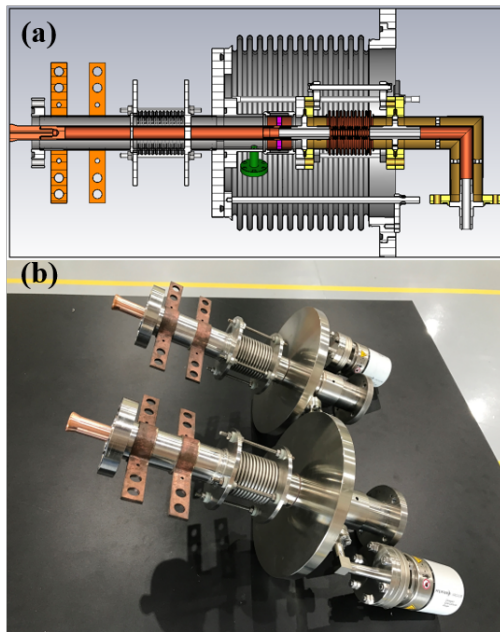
(a) Drawing of HWR RF power coupler. (b) Fabricated RF power coupler (cold section).
